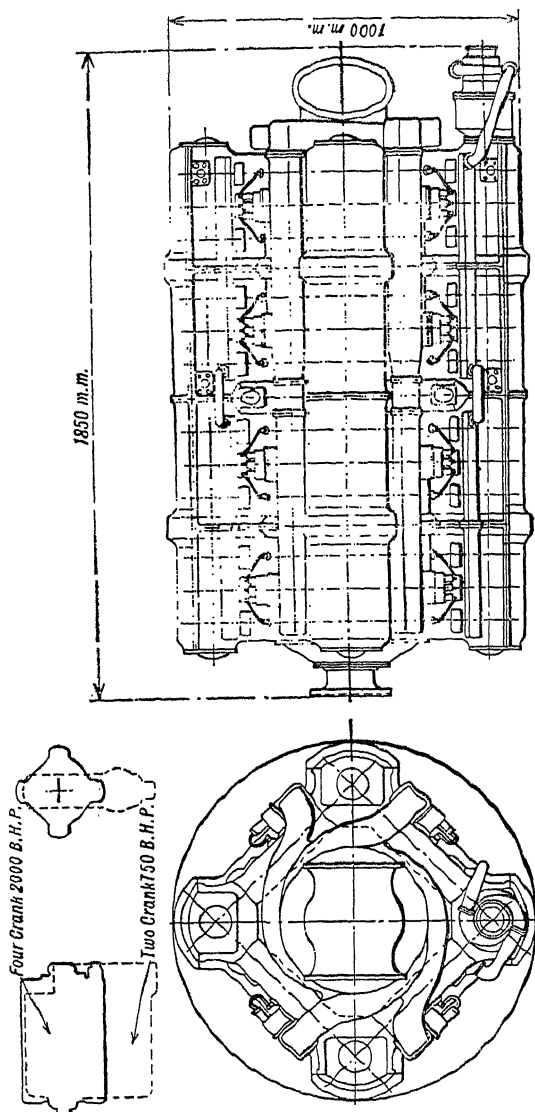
Schematic arrangement for sixteen-cylinder opposed piston engine (2,000 h.p.).
